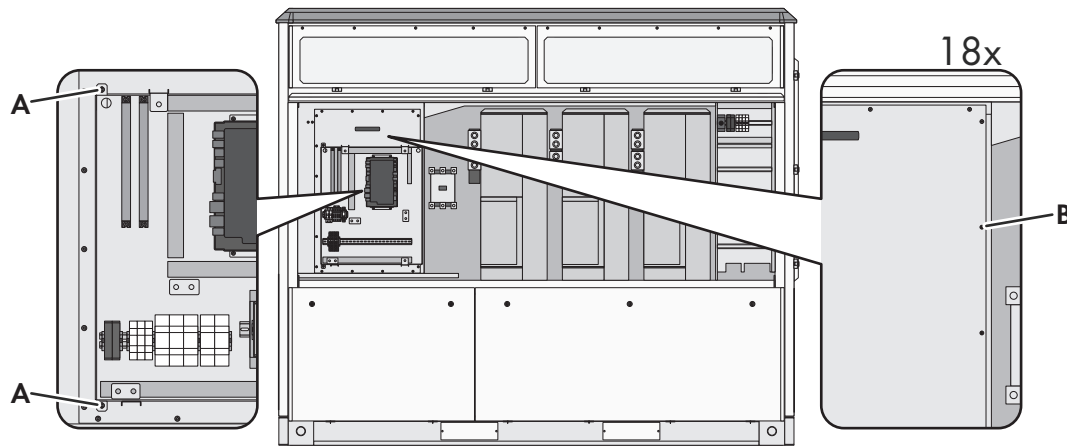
Position of the screw connections of the mounting plate and cover in front of the sine-wave filter capacitors
